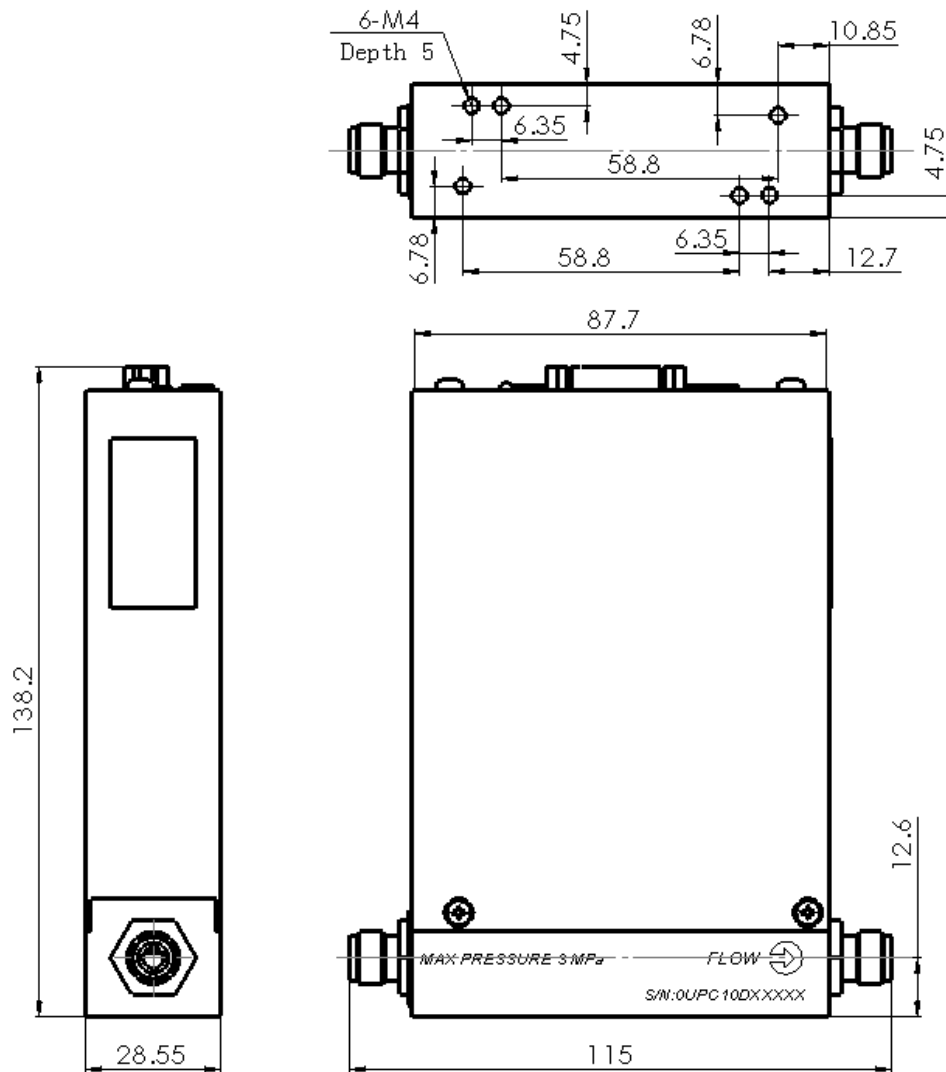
Product with Compression Fitting 1/4 inch dimensions
